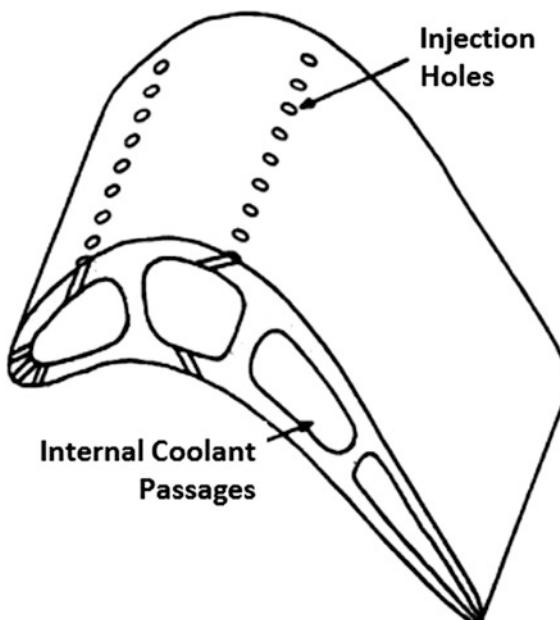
Gas turbine blade with film cooling. A coolant such as air travels through the internal coolant passages and comes out through the injection holes to cool the metal blade.
